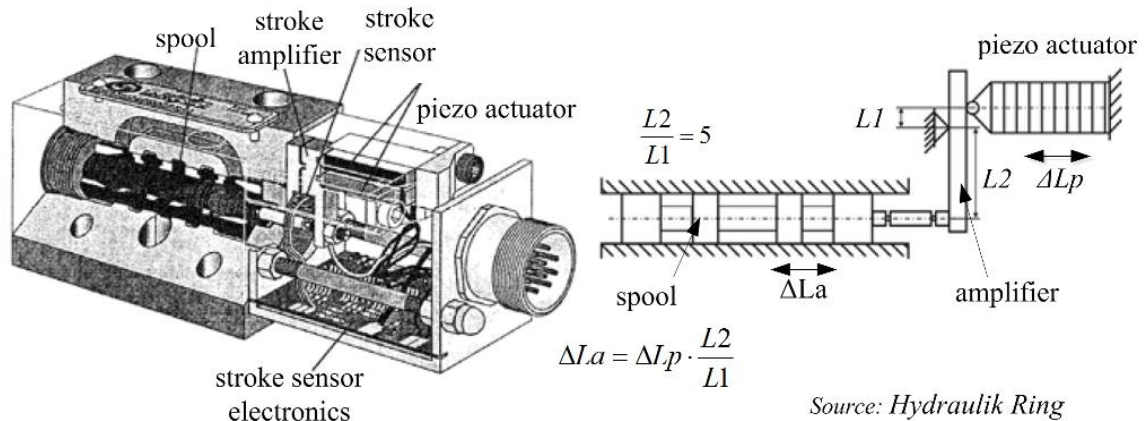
Hydraulic piezo valve using the mechanical amplifier [15], [16]
